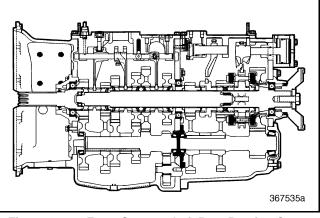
Front Countershaft Rear Bearing Cover Component Locator (T313L/T318L Shown)
